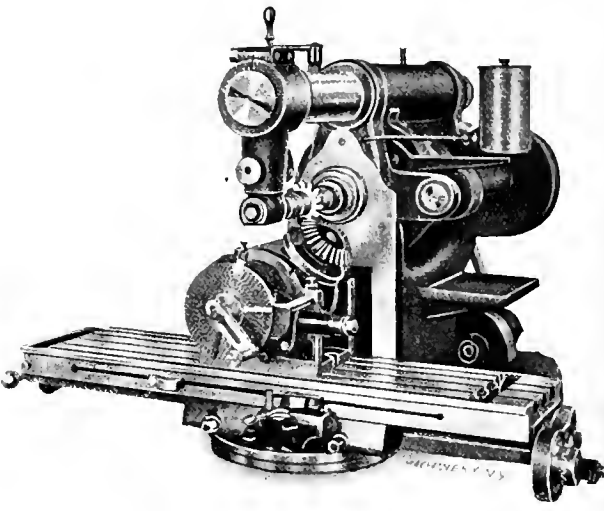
Cutting Bevel Gear Teeth on a Milling Machine by the Formed Cutter Method.
